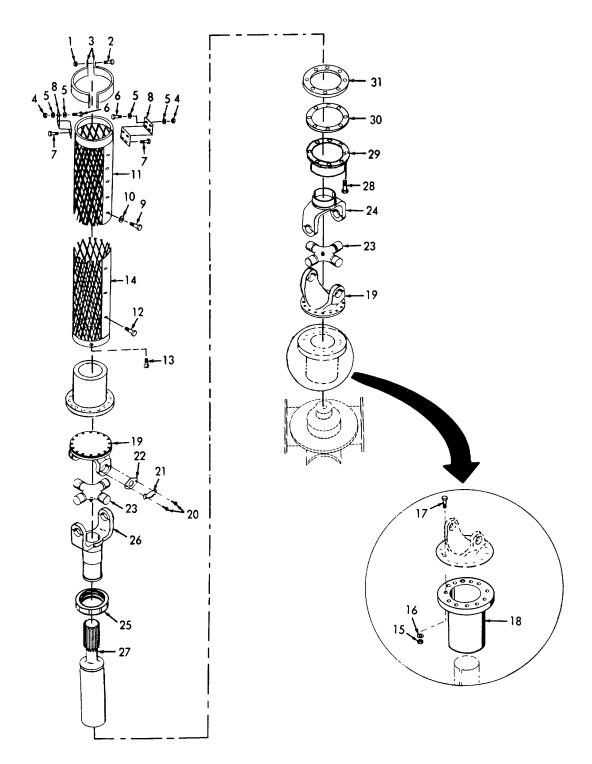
Shaft Assembly, Removal, Disassembly, Reassembly, and Installation.
